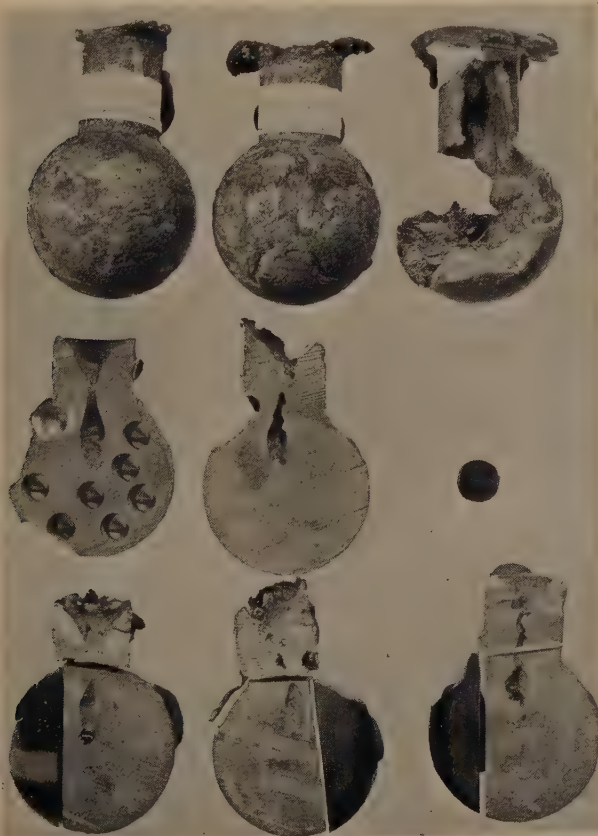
Bomb Samples as obtained and after Sectioning, showing also relative sizes of bomb section and vacuum fusion bar forged from the bomb sample.
